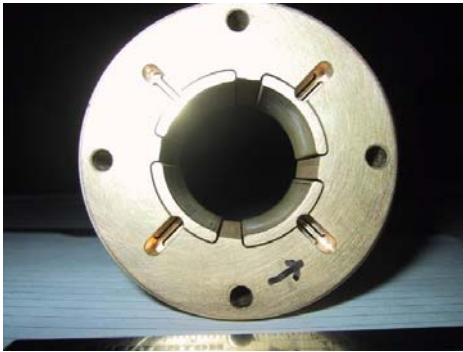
Flexure pivot tilting pad – gas bearing for oil-free test rig
